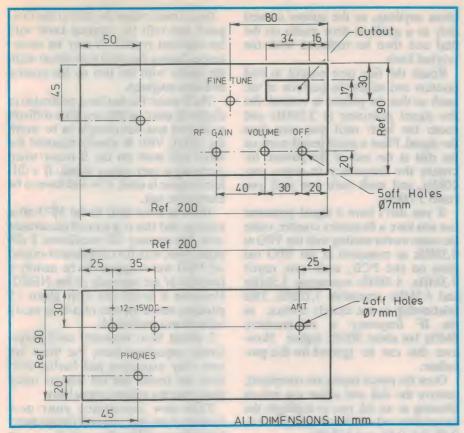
Use this drawing as a a guide to drilling the holes in the front and rear panels and also when you're adding the rub-on lettering.
